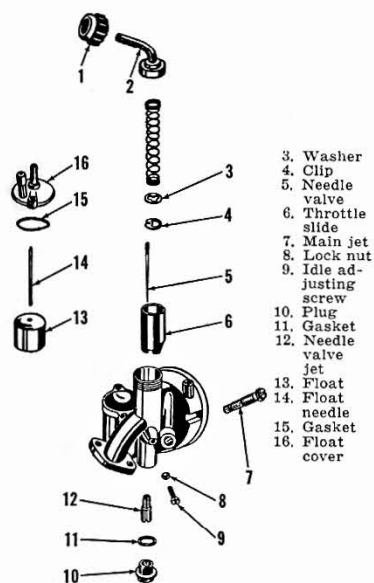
Exploded view of Bing 1/12 carburetor.
